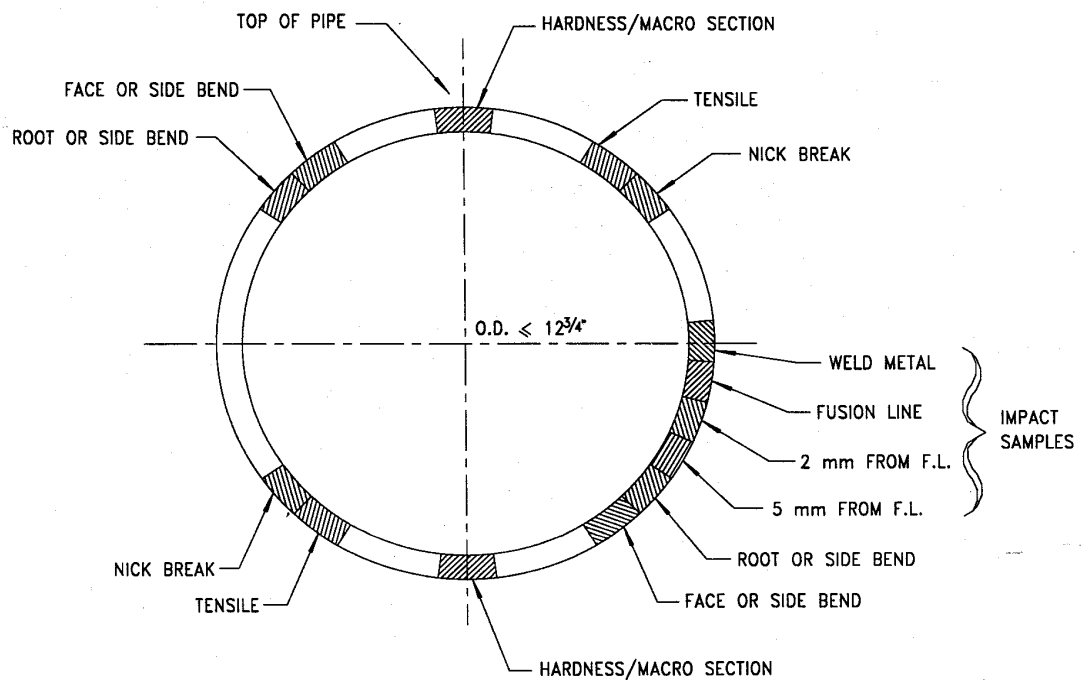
LOCATION OF SPECIMENS FOR WELD PROCEDURE
